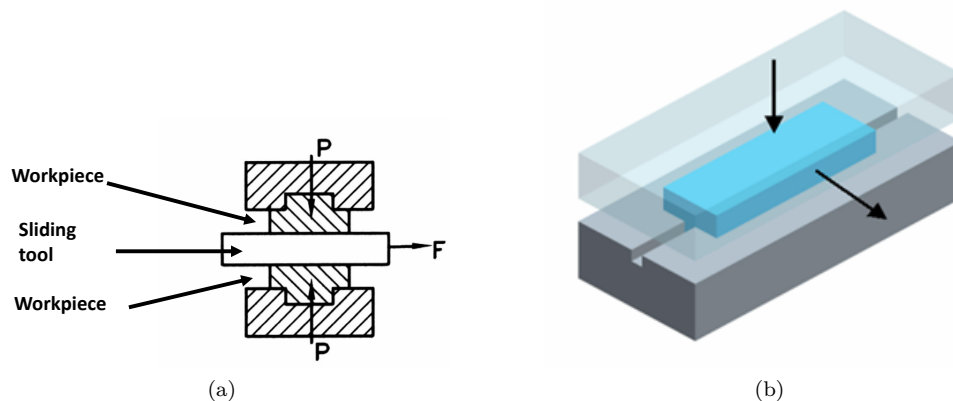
Sectional sketch of the working principle of the Micro Tribology Tester Figure (a). Figure (b) show the one-sided 3D model of the test, where the workpiece is marked blue and the tool is semi-transparent.
